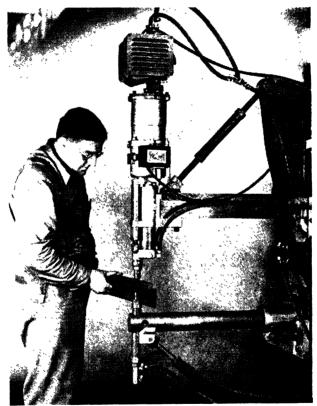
An electrical resistance type forge welder (Courtesy of: Progressive Welder Company)
